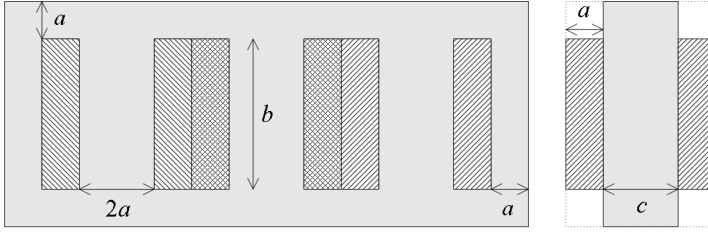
3-phase/5-limb transformer's front and side views
